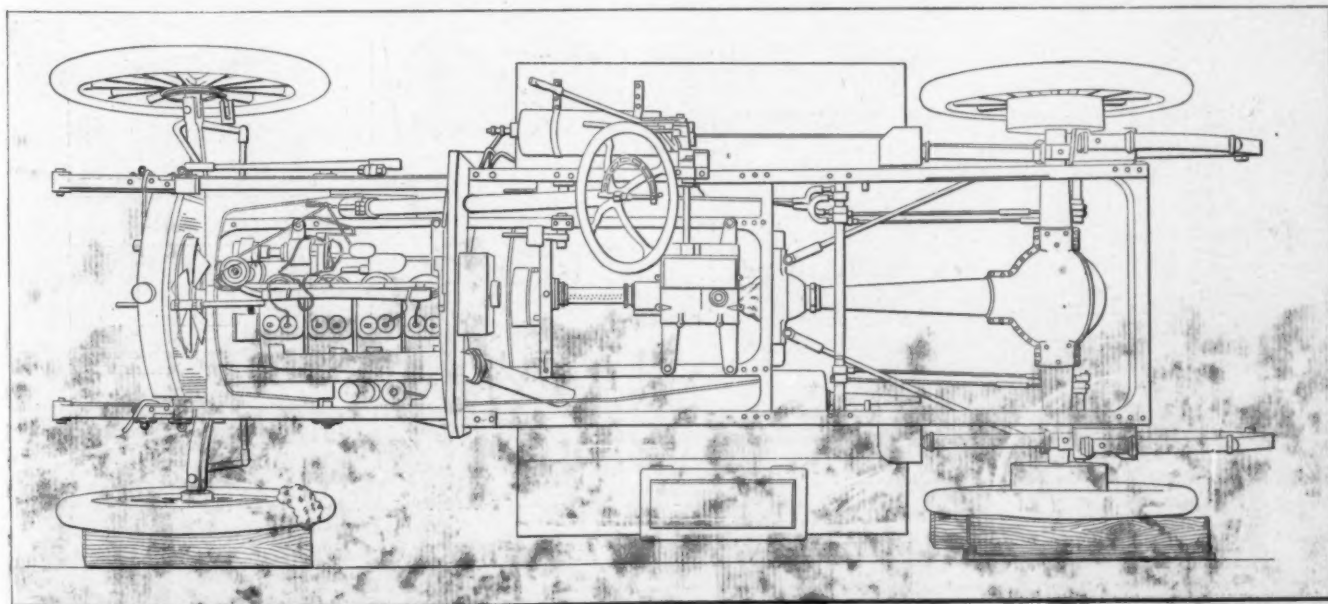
Stripped chassis, showing relations of units mounted on the double-drop I-section frame. This wax cut was made from a photograph of the car as it stood on blocks, resting on two wheels
